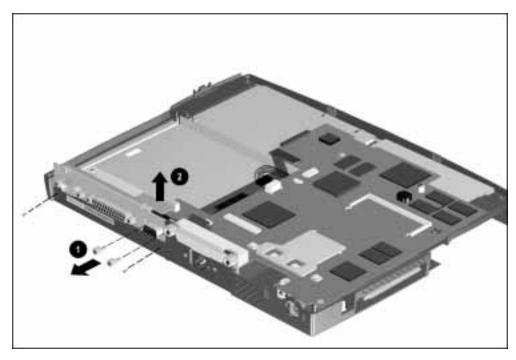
Removing the Screws from the I/O Fixture Connector
